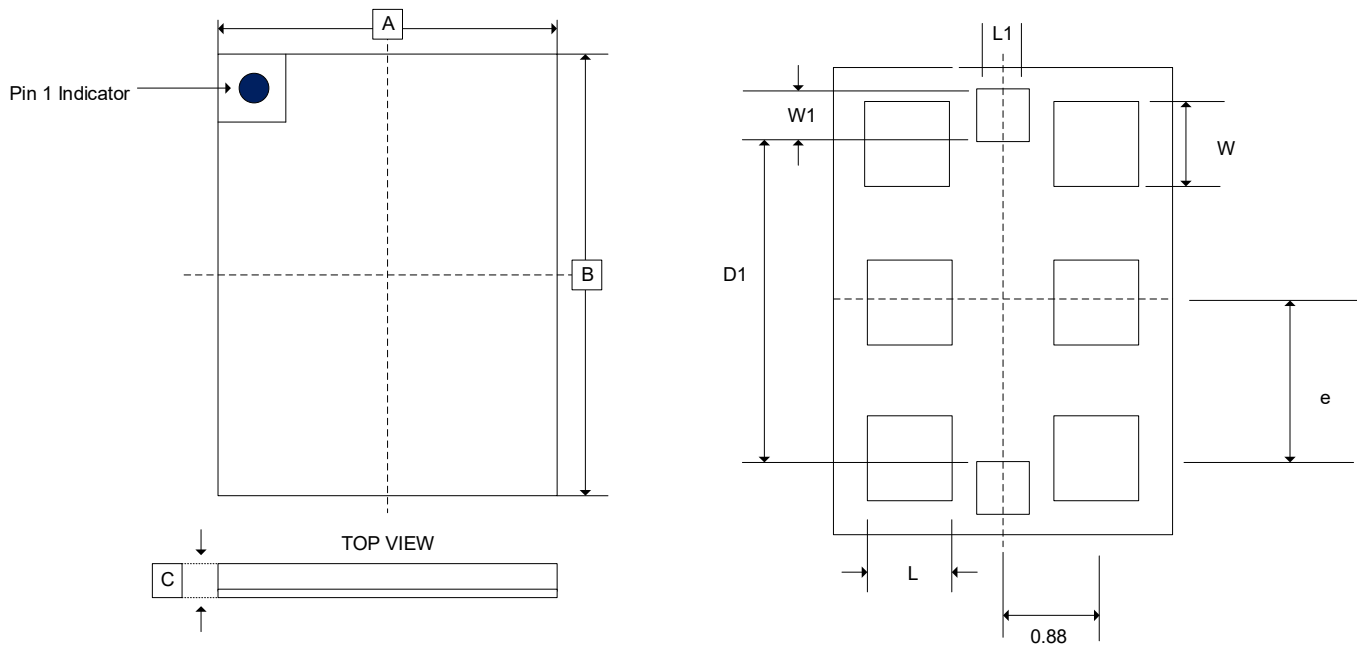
MS1220 Packaging Drawing (3.2mm x 2.5 mm)
